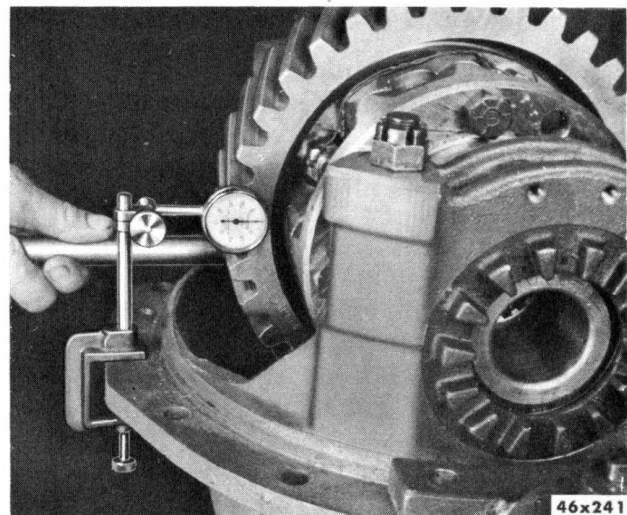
Checking Spur Gear and Differential Assembly End Play
